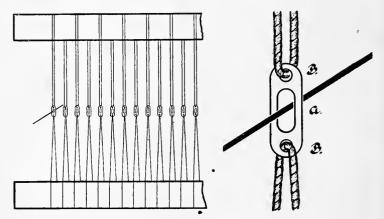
ILLUSTRATING THE CONSTRUCTION OF GEARS
